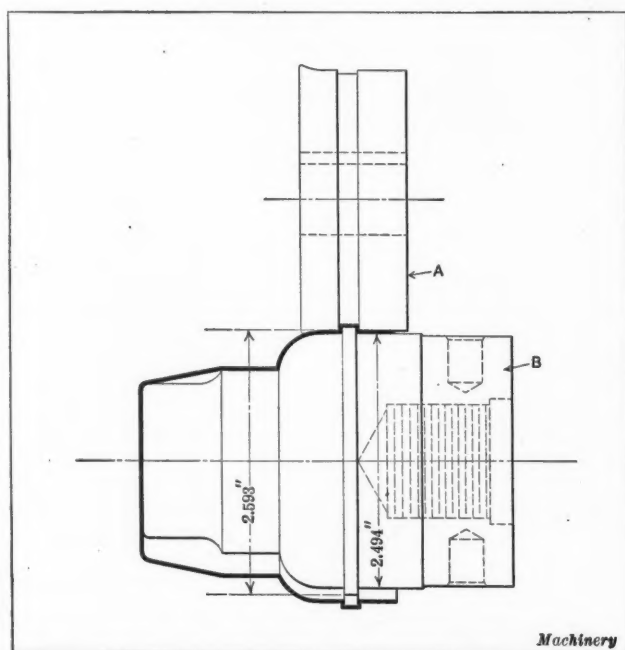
Forming a Bead on the Large Diametral Surface of the Shell in a Lathe
